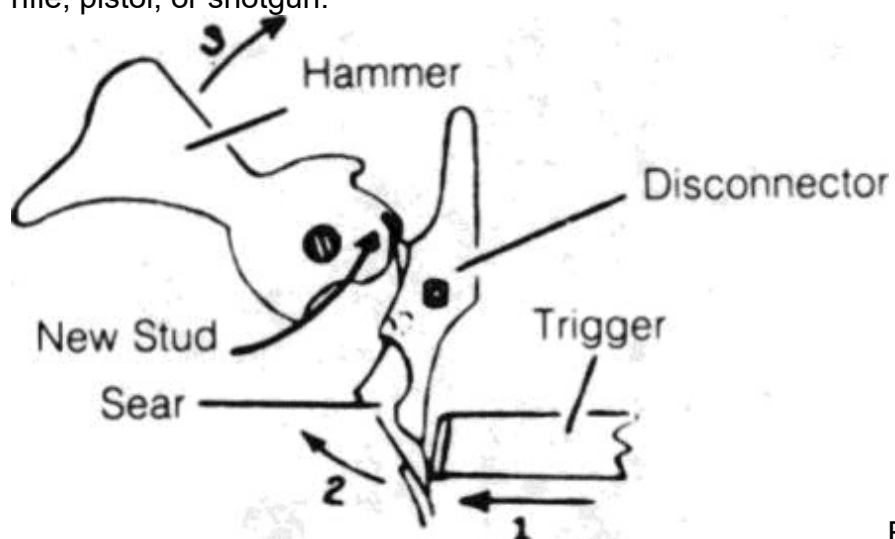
Method of adjusting trigger pull when too much metal has been removed from the sear/hammer mating surfaces.
